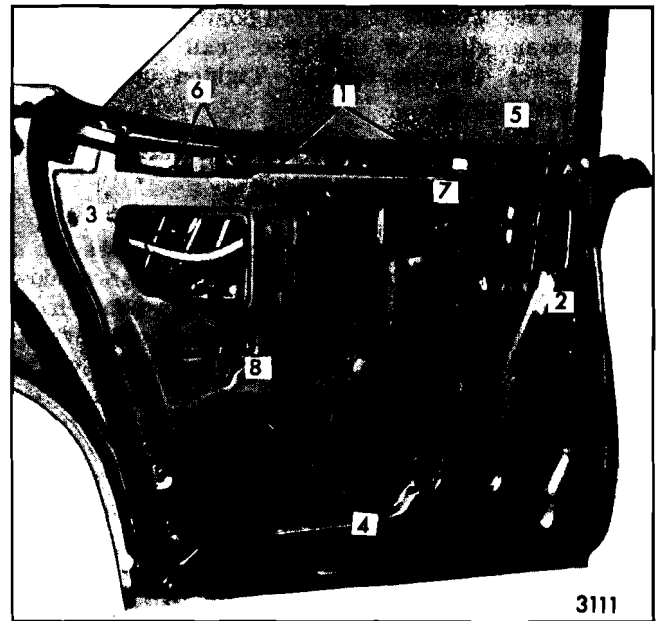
Rear Door Removal and Adjustments - "B-39" and "C-39, 49, and 69" Styles
